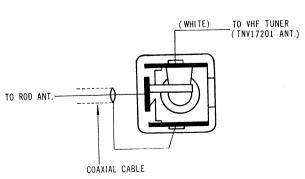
ANTENNA SOCKET (REAR VIEW)
